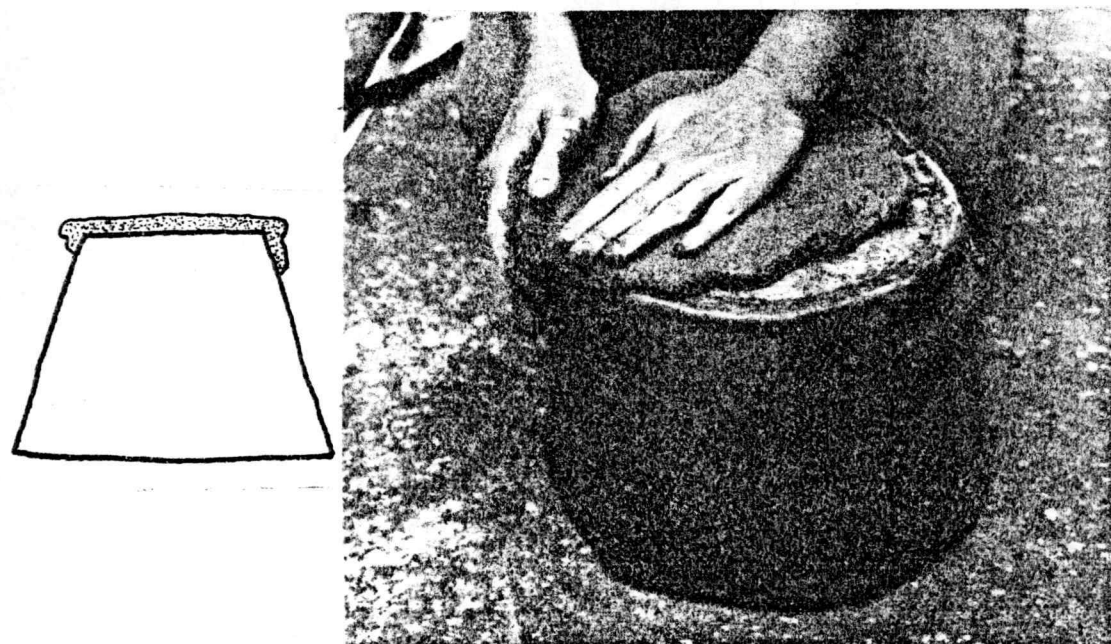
Left, Cross-Section of Rawhide Mould with Clay Pressed Over Base. Right, Photo of Same.
